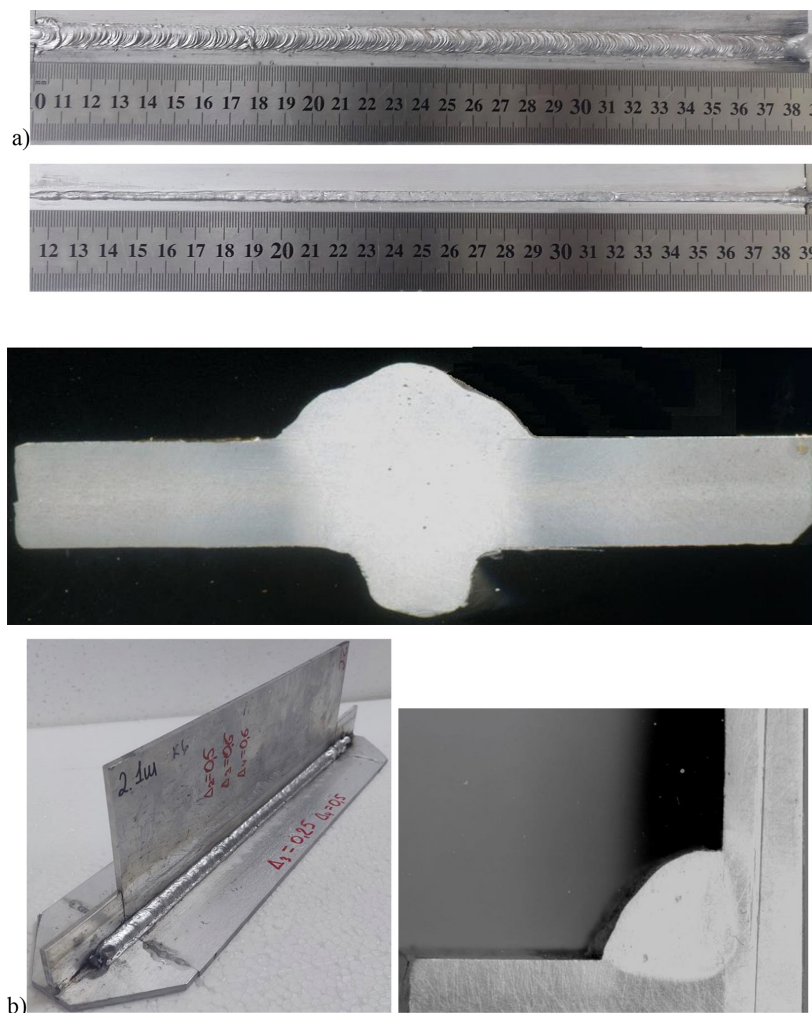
Appearance and cross-sections of butt (a) and tee (b) welded joints of 1561 alloy
